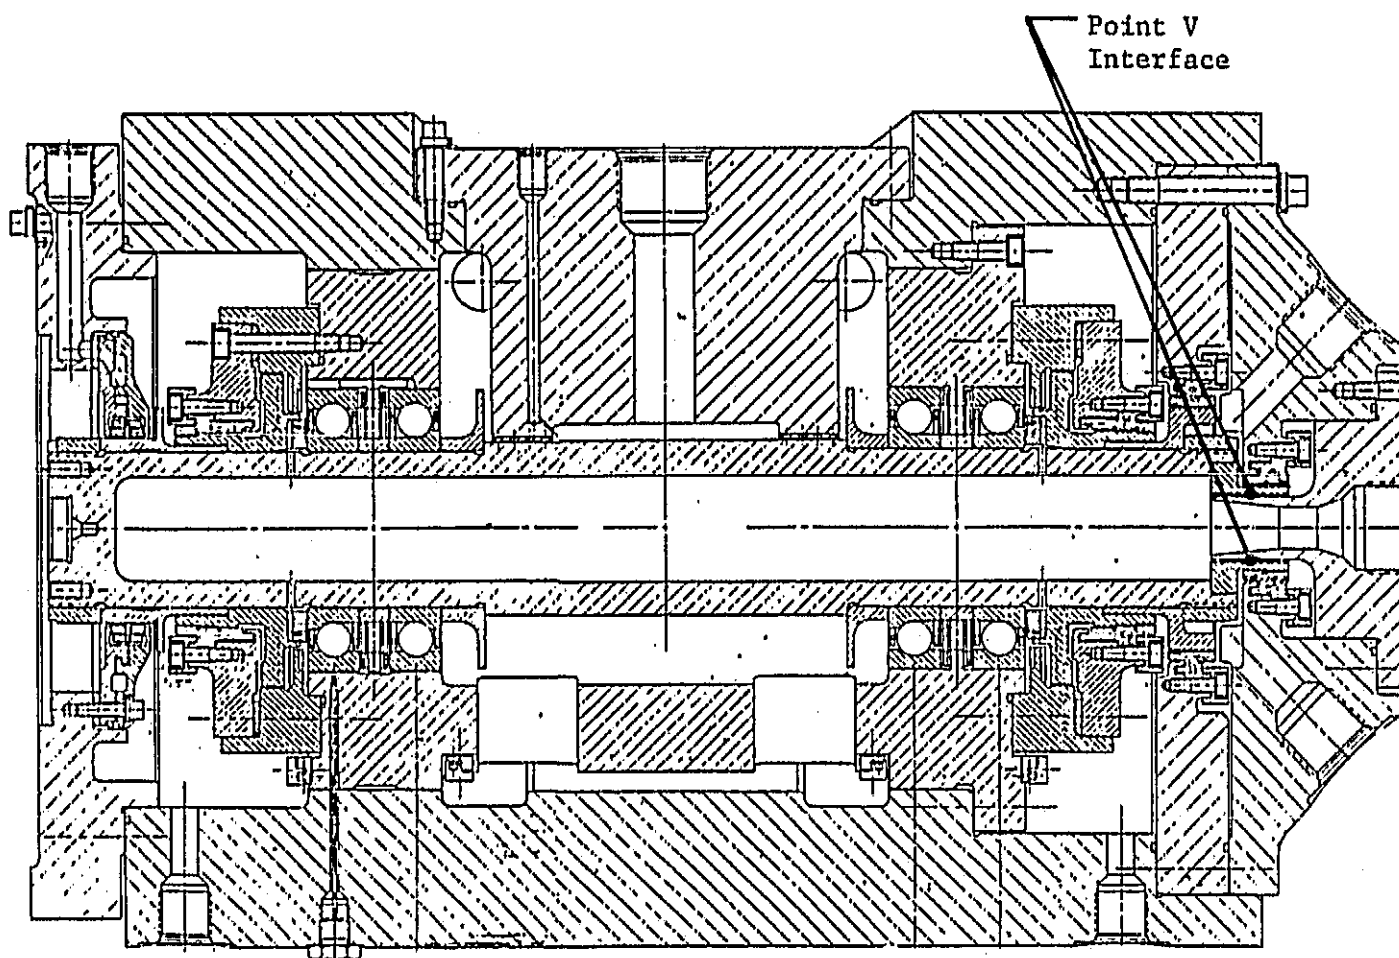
Inlet Cap-to-Shaft Plug (Point V)
